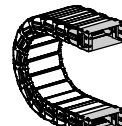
Fig. A Chain can be fixed frontally, inner or outer radius. (Fig. A)
